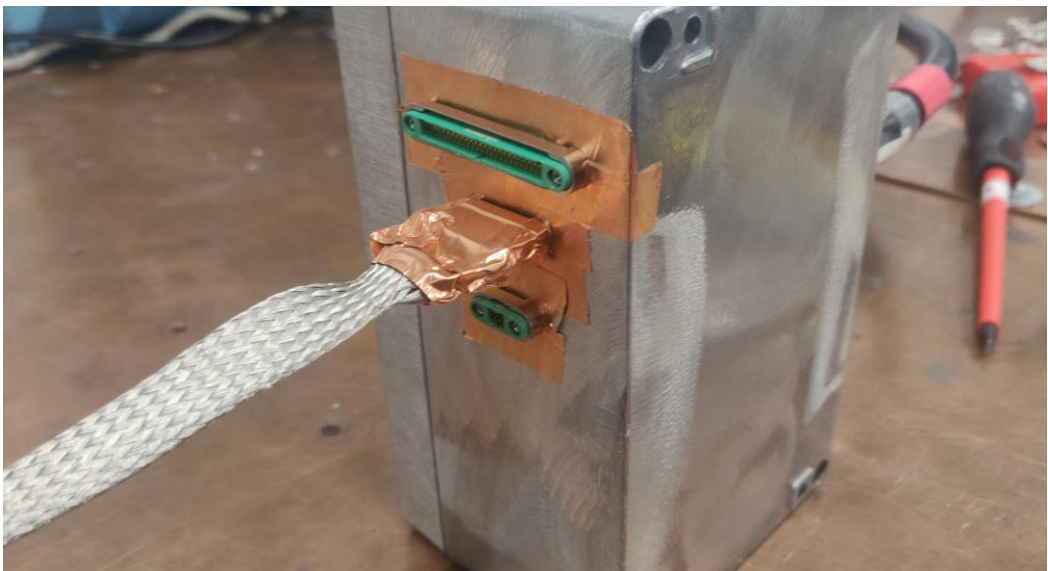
Copper Screening on the Back shells: 16-way cable assembly
